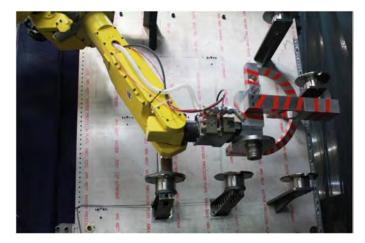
M20 robot reaching to the collar swage / nutrunner / vacuum nosepiece tool rack during high payload testing.
